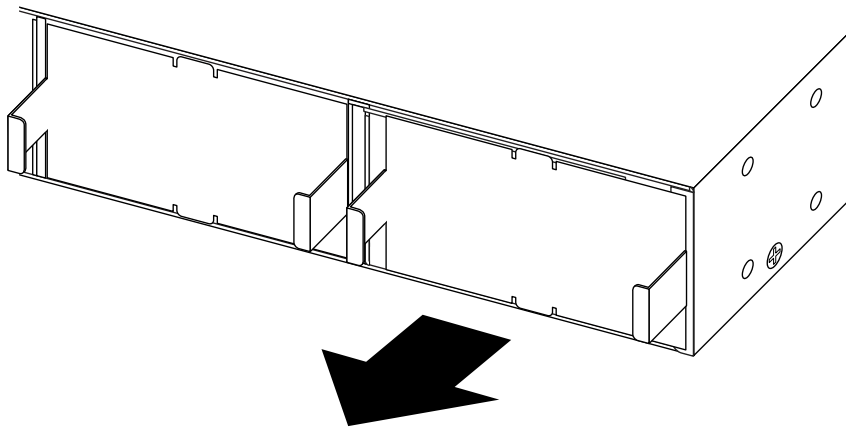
Removing a Blank Panel from the EPS-C2 Chassis
